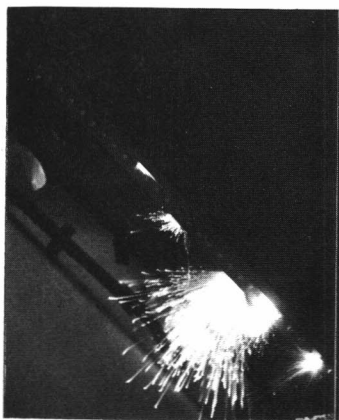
B SEVERE SPARKING FROM ANODIZED RIVETS, FASTENING STRINGER, LANDING MEMBER, SKIN PLATE
